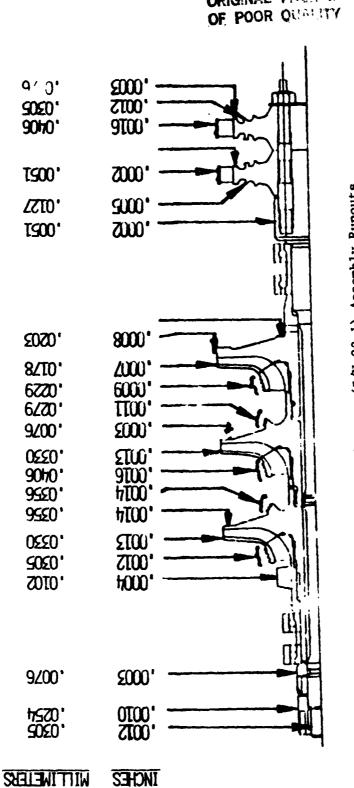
Mark 48-F Turbopump Rotor Balance Assembly
